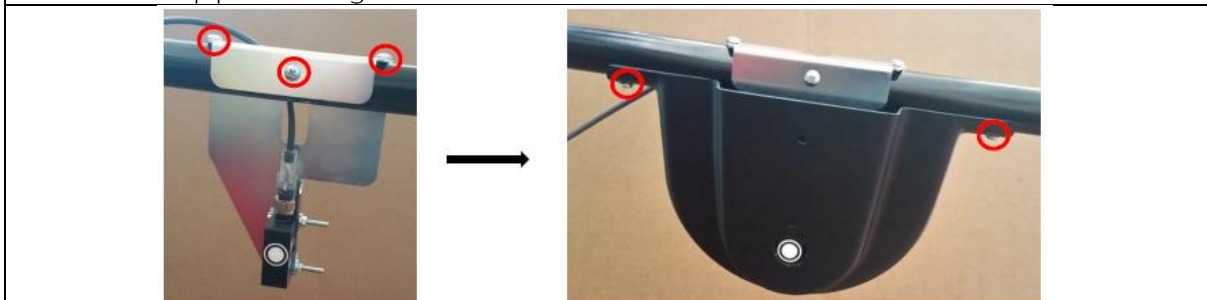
Figure F6.24: Fix the SONAR device to the tube. Mount the plastic carter fixing with the relevant screws.
